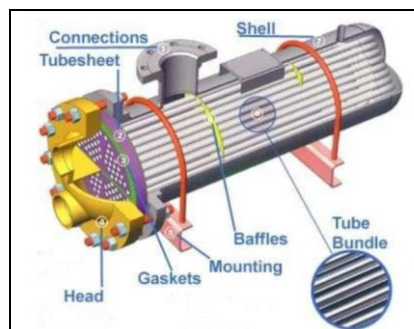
General Assembly of Pressure Vessel & Pattern of tubesheet
